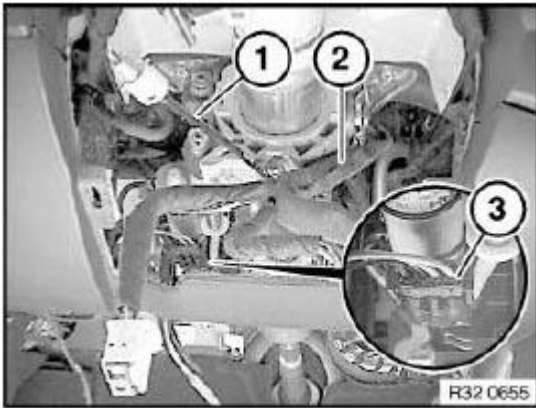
Identifying Interlock Cable, Plug Connection And Wiring Harness
